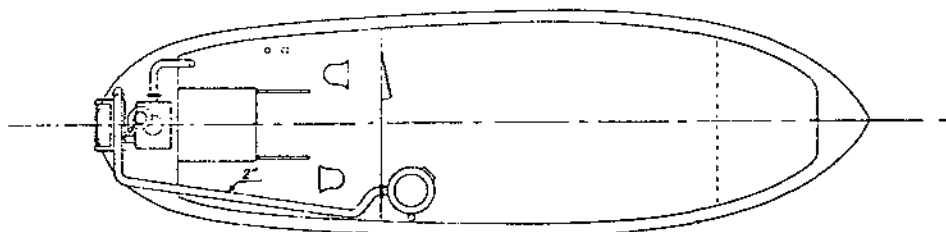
Installation Drawings for a Wood Gas Generator for a Boat.
